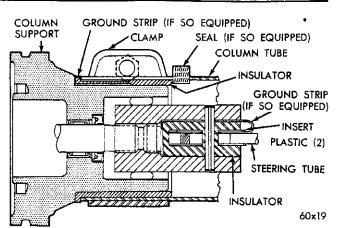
Jacket Tube and Column Tube (Cross Section)
